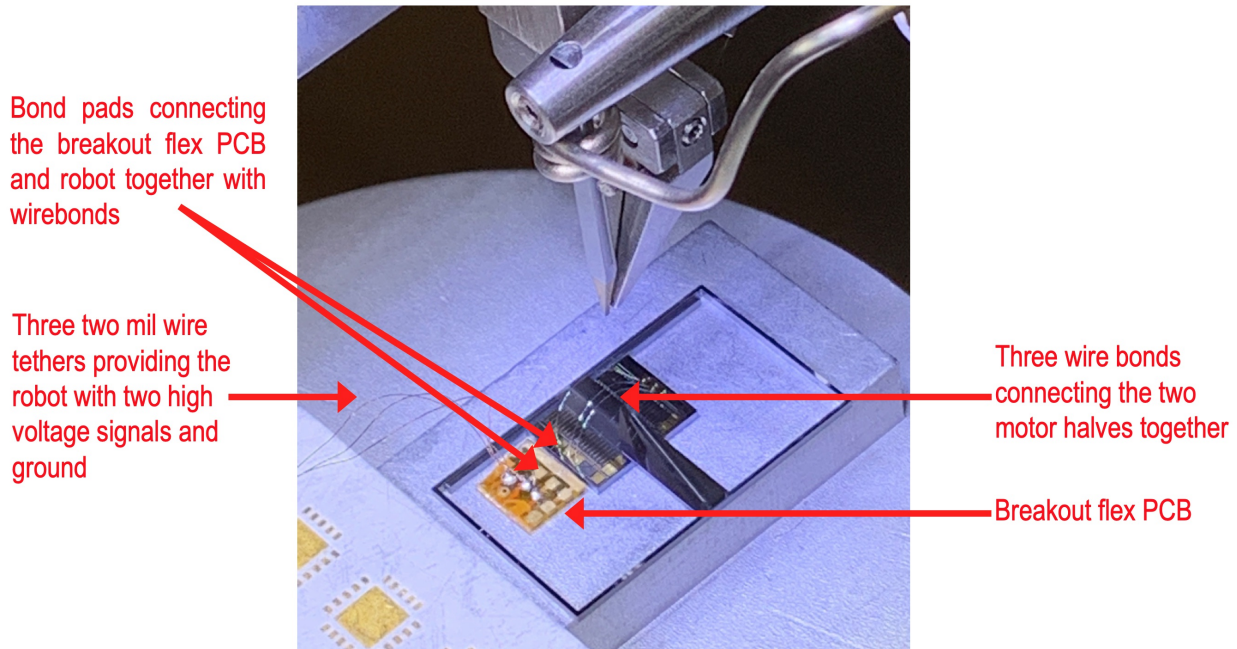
The robot lying flat on a wirebonding chuck. The robot is being joined to the breakout flex PCB with wirebonds.
